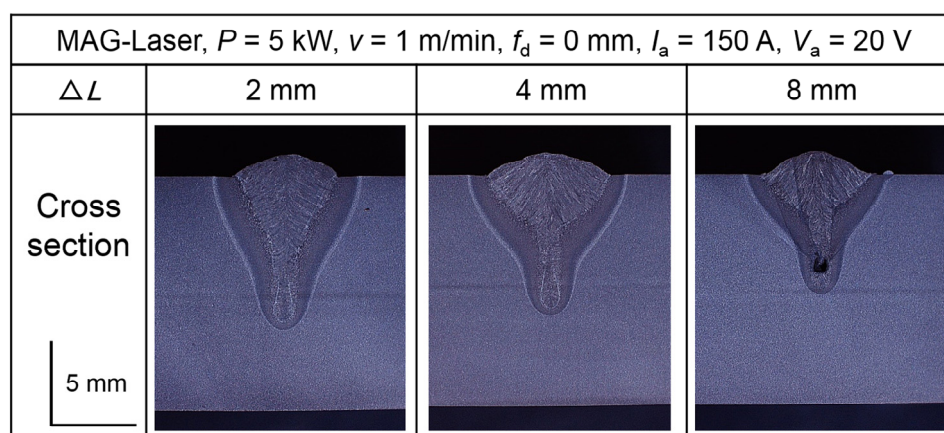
Cross sections of weld beads produced by MAG-Laser hybrid welding at various laser-arc distances.
